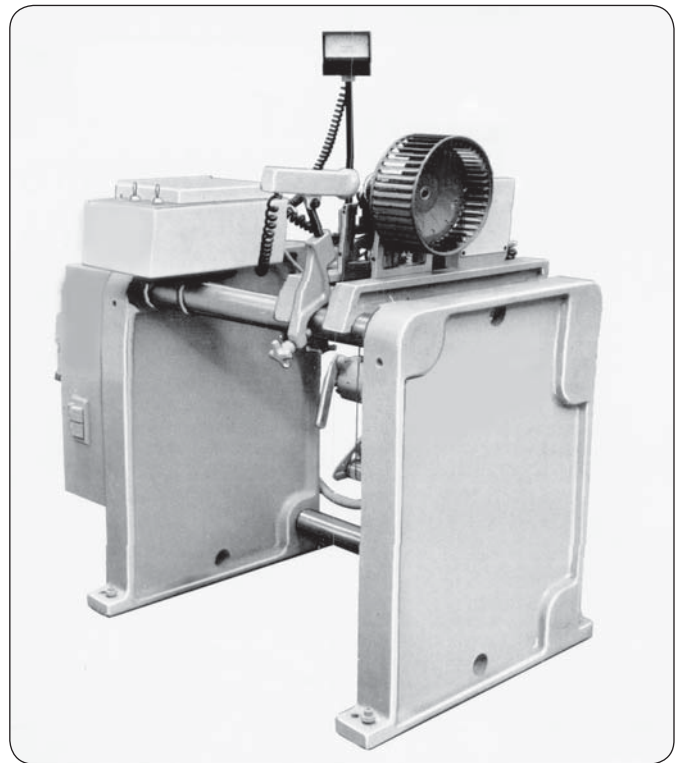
Balancing machine. (Photograph courtesy of Gilman, a division of Giddings & Lewis, Inc.)
